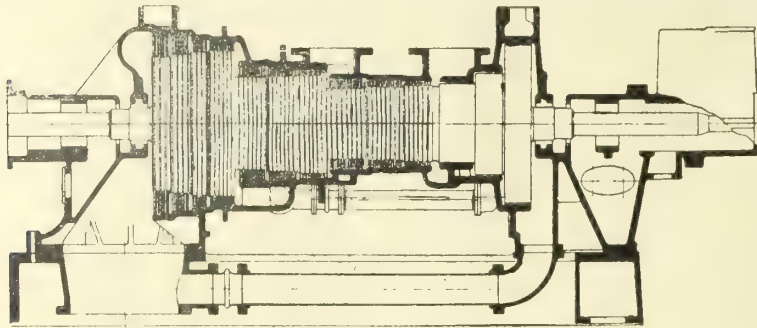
SINGLE PARSONS TYPE TURBINE.
